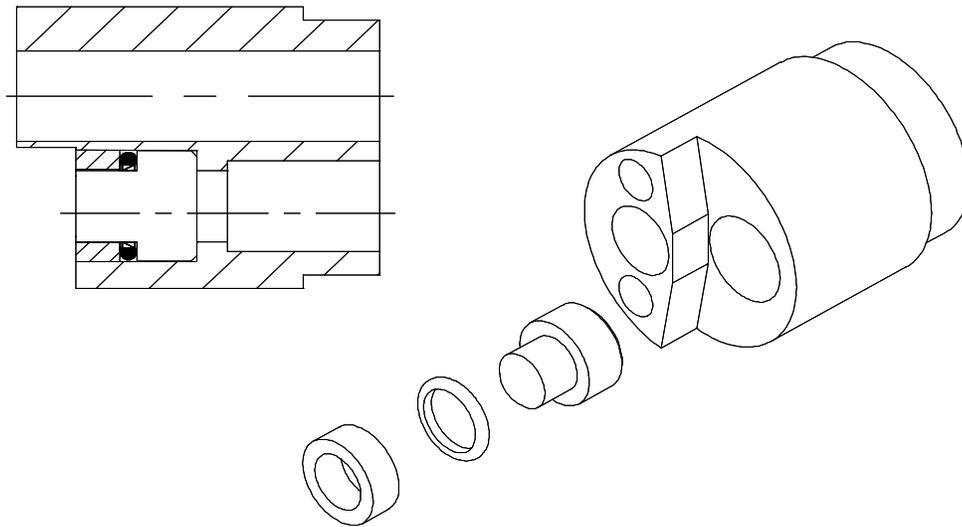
Cross section and exploded view of Axiom's welded metal seal assembly as used in the FPT-850 transmission probe.
